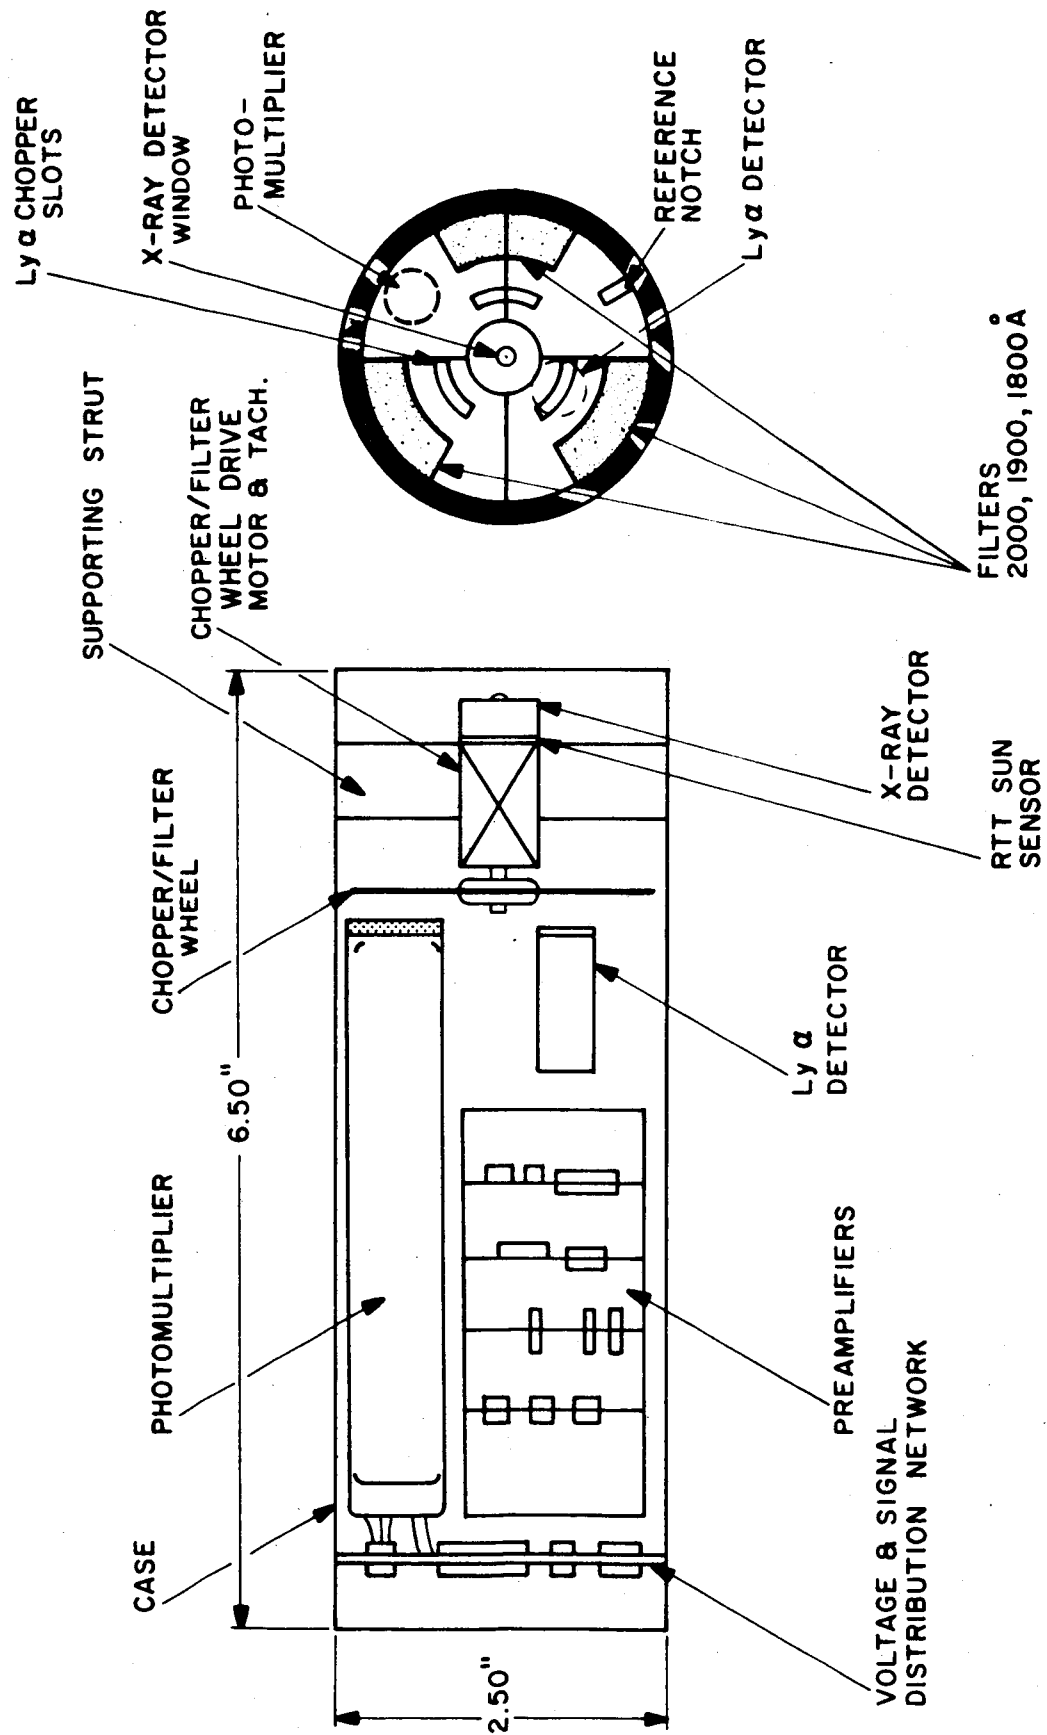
DETECTOR AND SUN SENSOR ASSEMBLY
